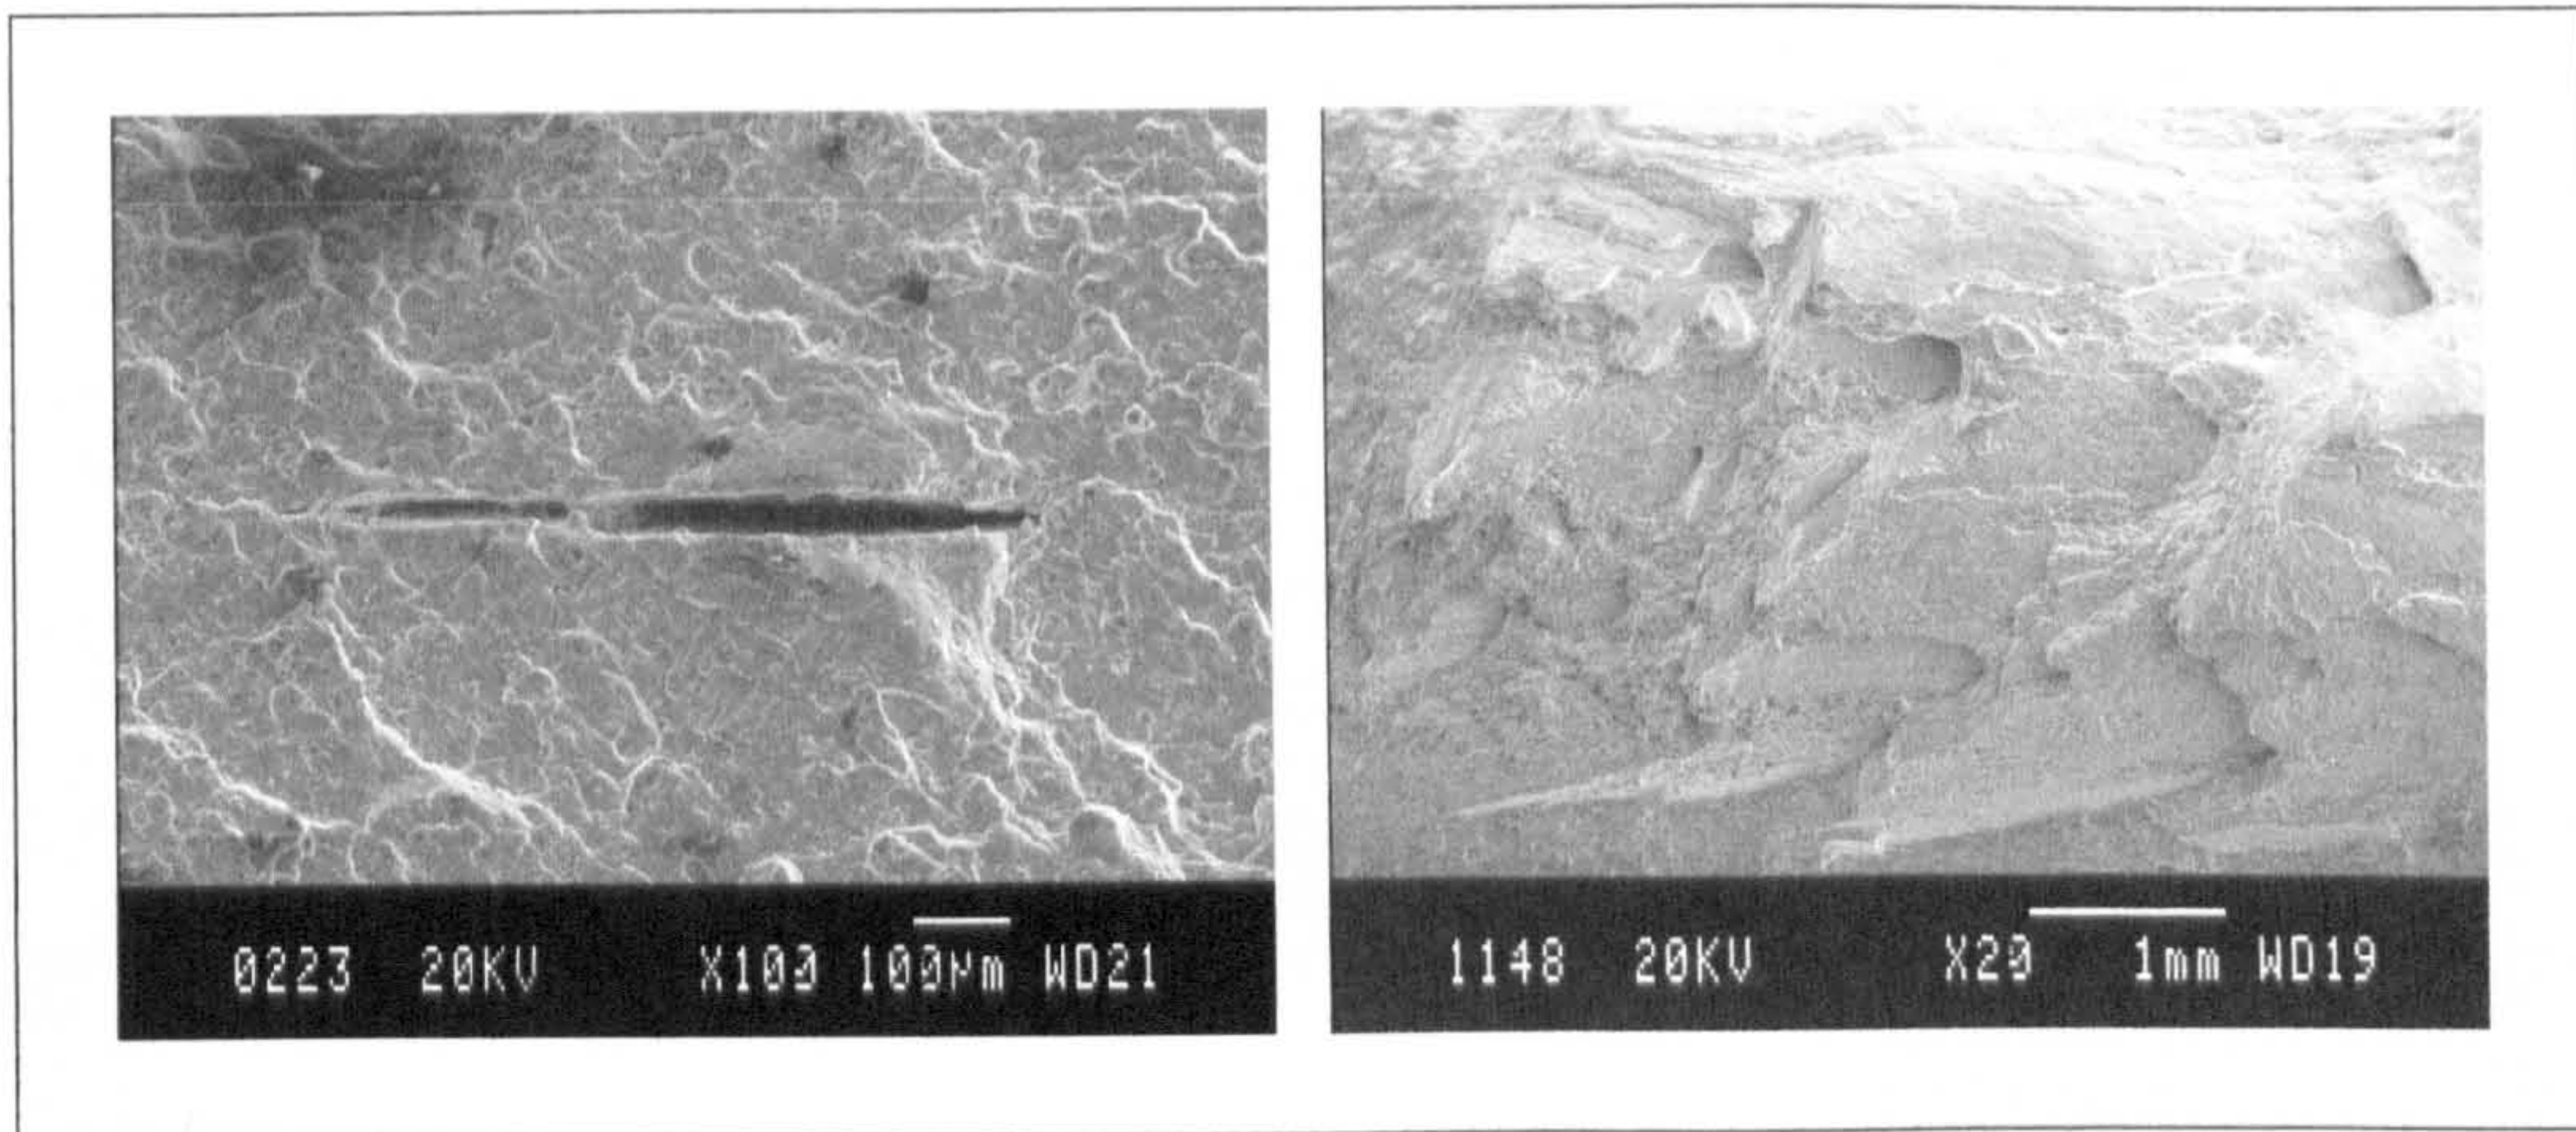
Partial fusion defects on FS SP fatigue fracture surfaces, LS plane.
